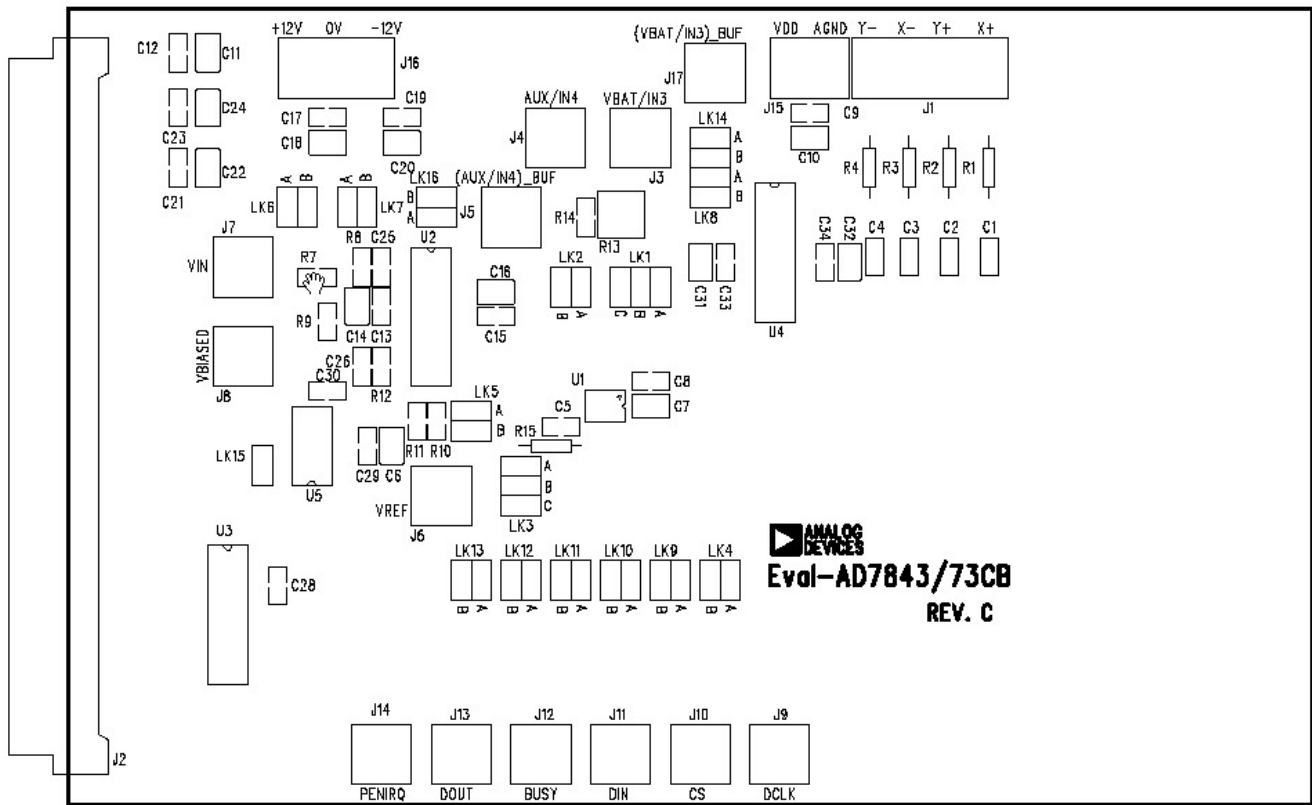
AD7843/AD7873 Evaluation Board Component Placement Drawing
